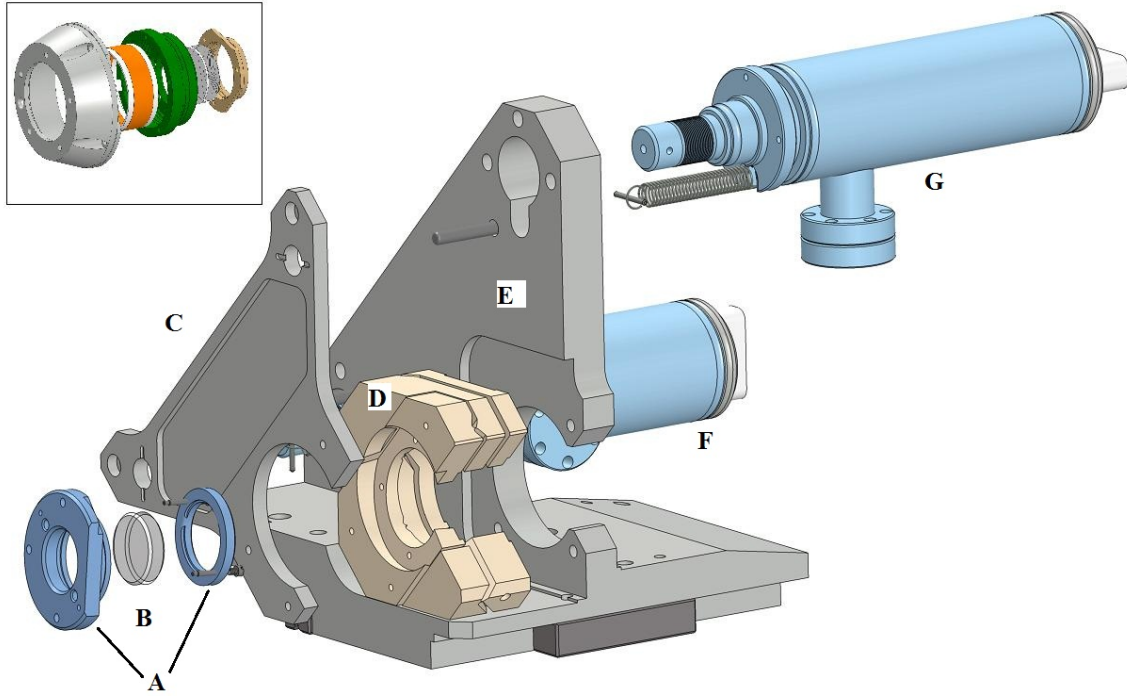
Exploded view of the tilt system. A: mirror ring system; B: cavity mirror; C: triangular arm; D: gimbal mirror mount; E: mirror mount support; F: encapsulated motor for actuating the rotation along the x horizontal axis; G: encapsulated motor for actuating the rotation along the y vertical axis. On the top left of the figure, the mirror ring containing the annular piezoelectric transducer (represented by an orange cylinder) is also shown.
